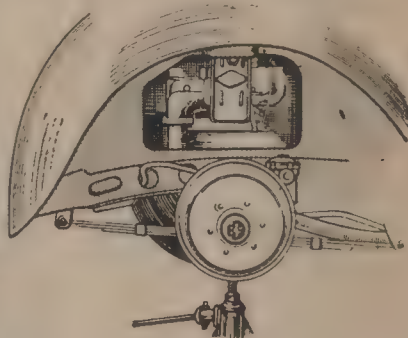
On the Series E "Eight" access to the carburettor, manifold and valve chamber is simplified by removal of the inspection plate from the nearside wing, after taking off the wheel.
